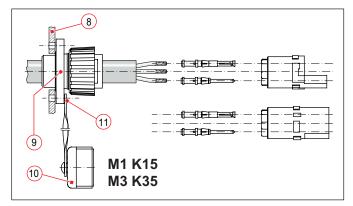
Example of assembly for flange mount plugs on a mounting wall (applies also for receptacles with flange)
